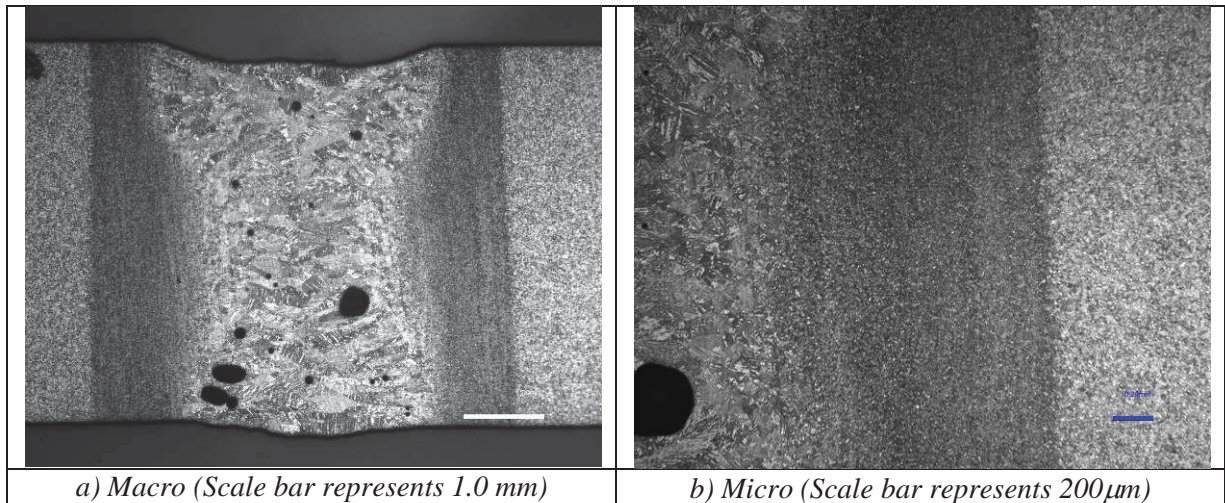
Welding condition of 3 kW and 12.5 mm/s (240 J/mm)
